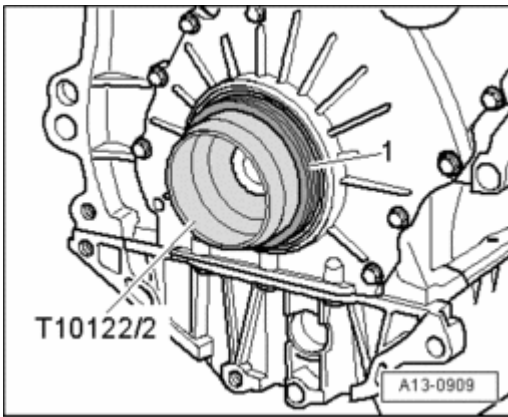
Inserting Guide Sleeve T10122/2 With Oil Seal Onto Crankshaft
